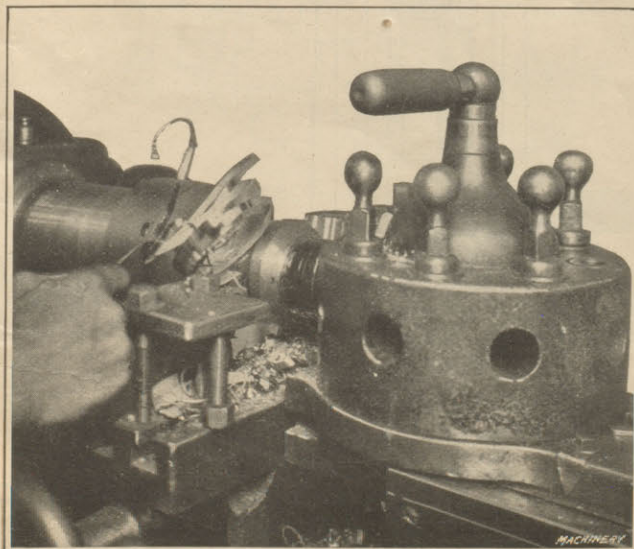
Finishing Rifling Band on Shrapnel Shell to Shape
